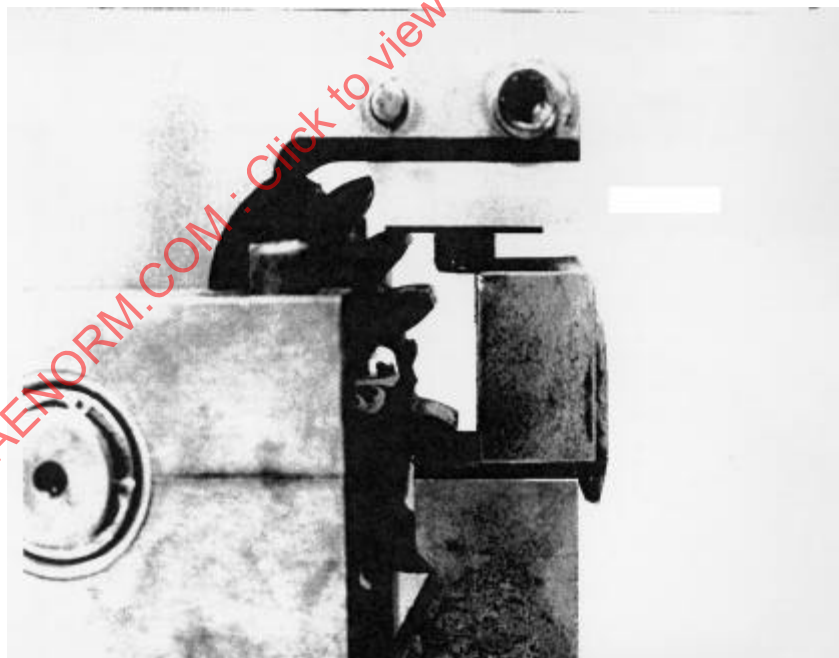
CLOSE-UP OF TEST GEAR SET-UP
